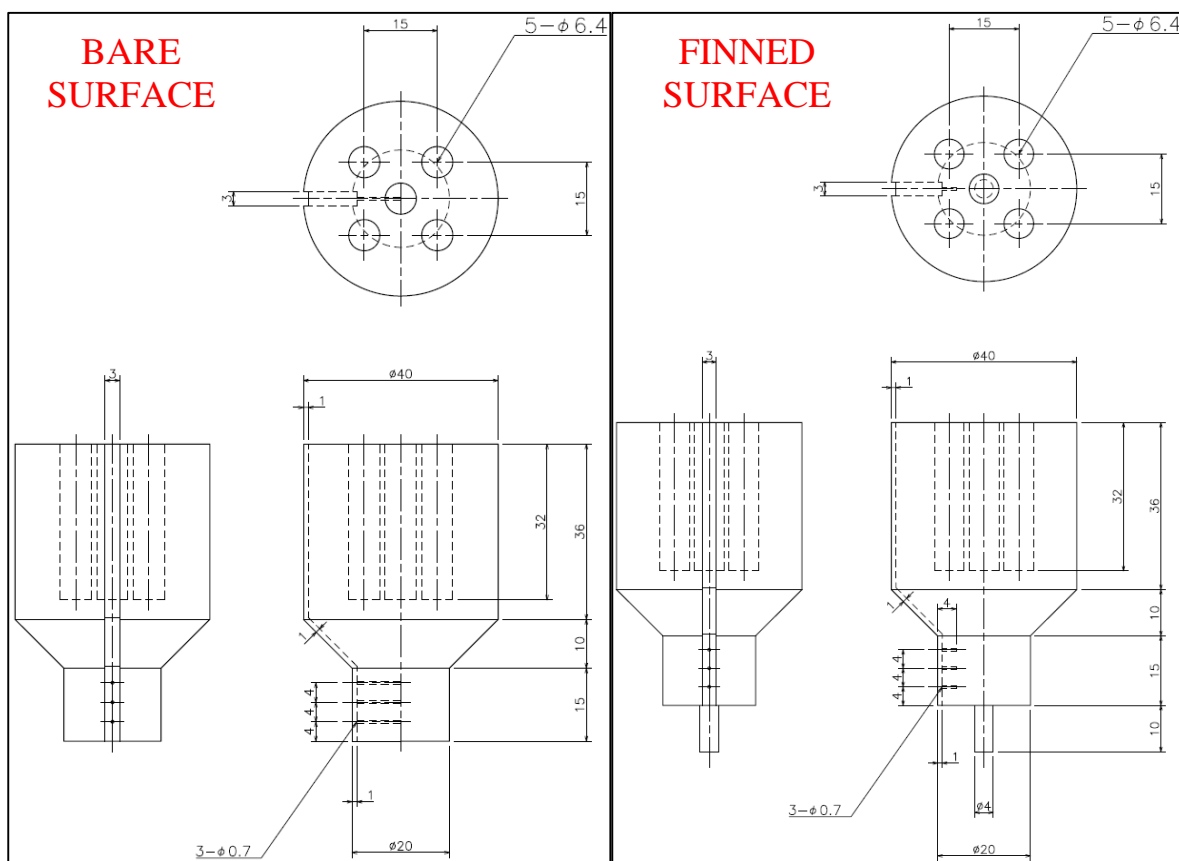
CAD drawings of bare and finned copper blocks (dimensions in mm).
